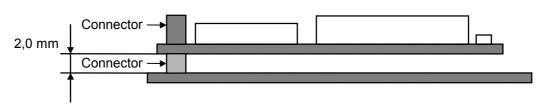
No components fitted on target PCB below HW 86012. Minimum distance between PCBs 2,0 mm
